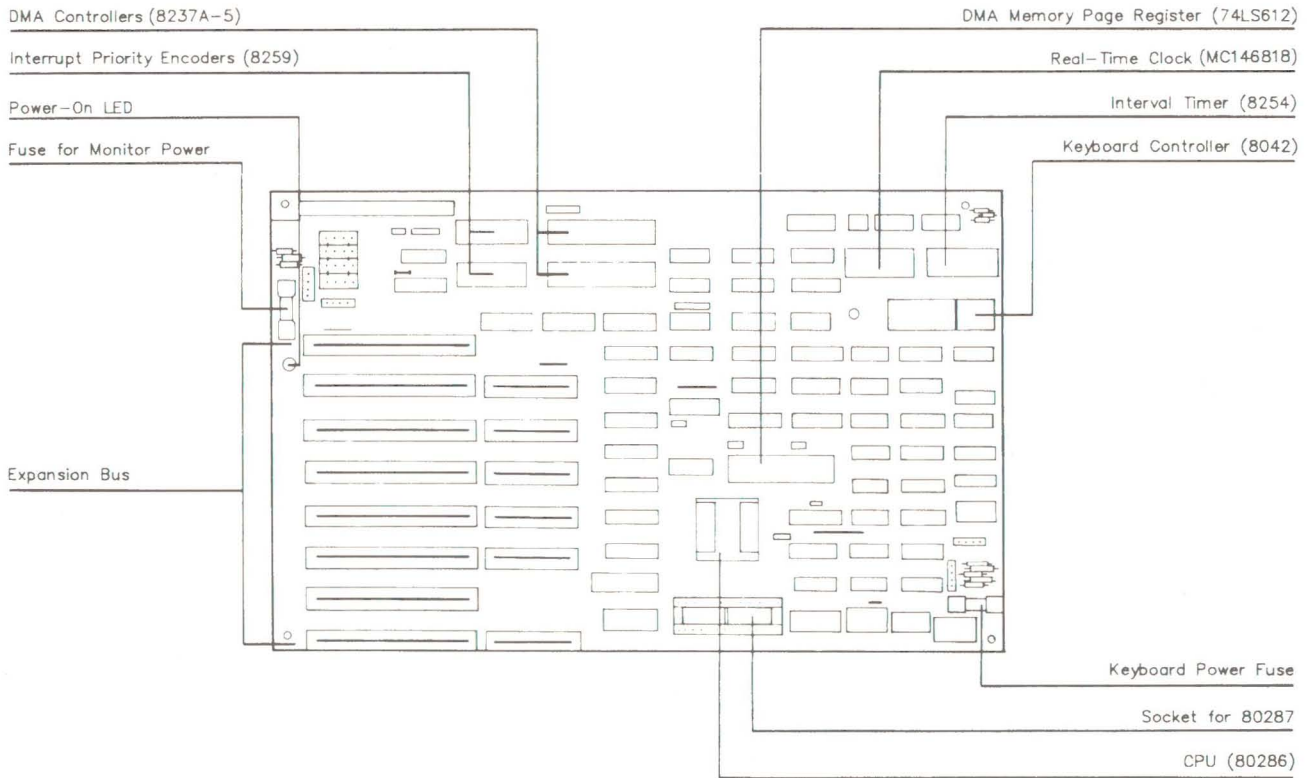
COMPAQ DESKPRO 286 Version 1 System Board Component Layout (Page 1 of 1)
